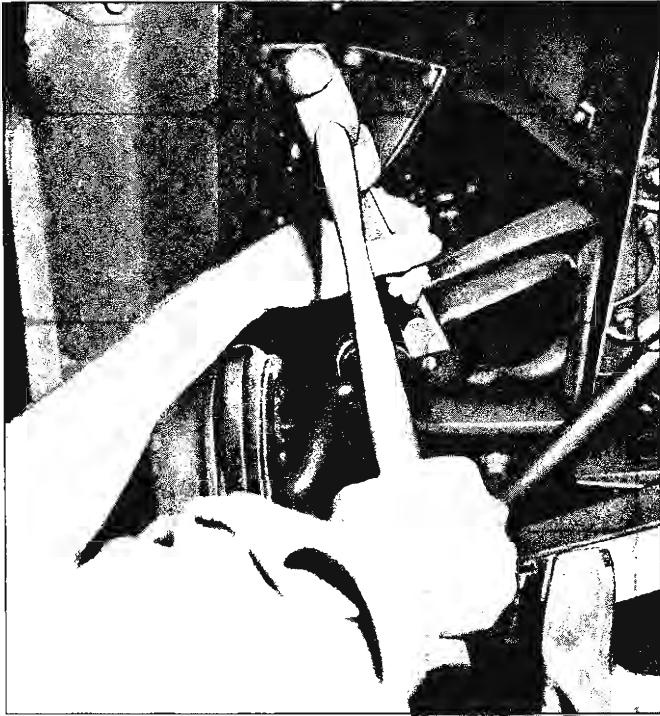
Cutting Upper Ball Joint Rivet Heads—Chevy II
